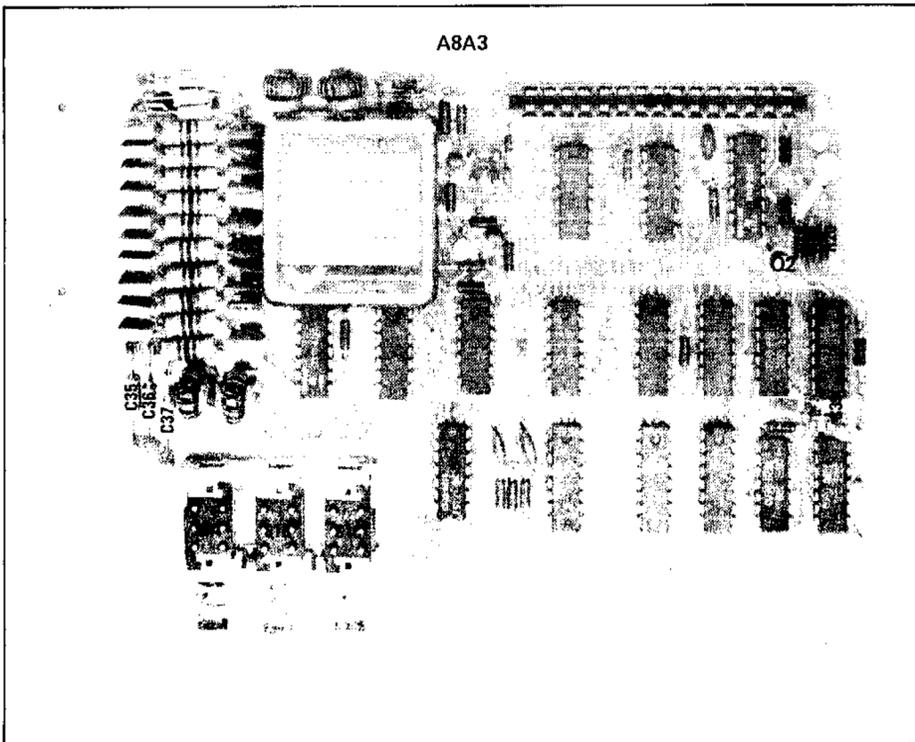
P/O A8A3 Time Base Assembly Component Locations
